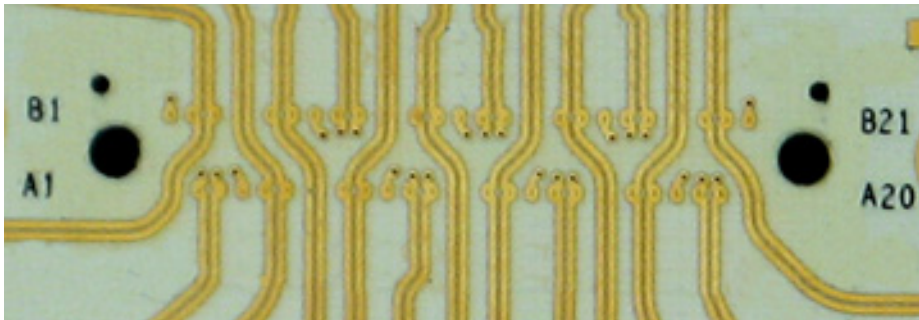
Full Size PCIe Gen 3 PCB Footprint
